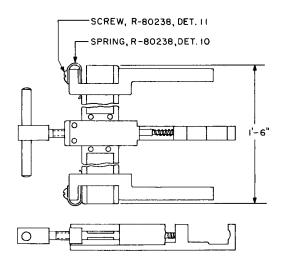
R-80238 Shaft-Straightening Fixture Tool
